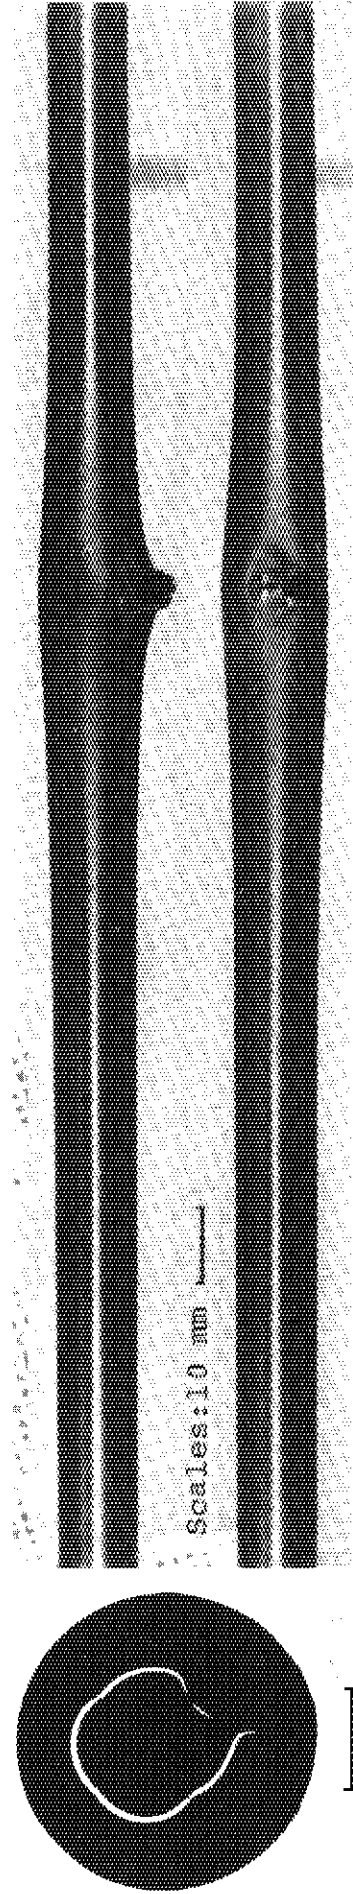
Specimen cladding of Case A-4 (Fig.12). Seen from two directions (Right); cross section at rupture site (Left). Tested in eight external heater pipes.
